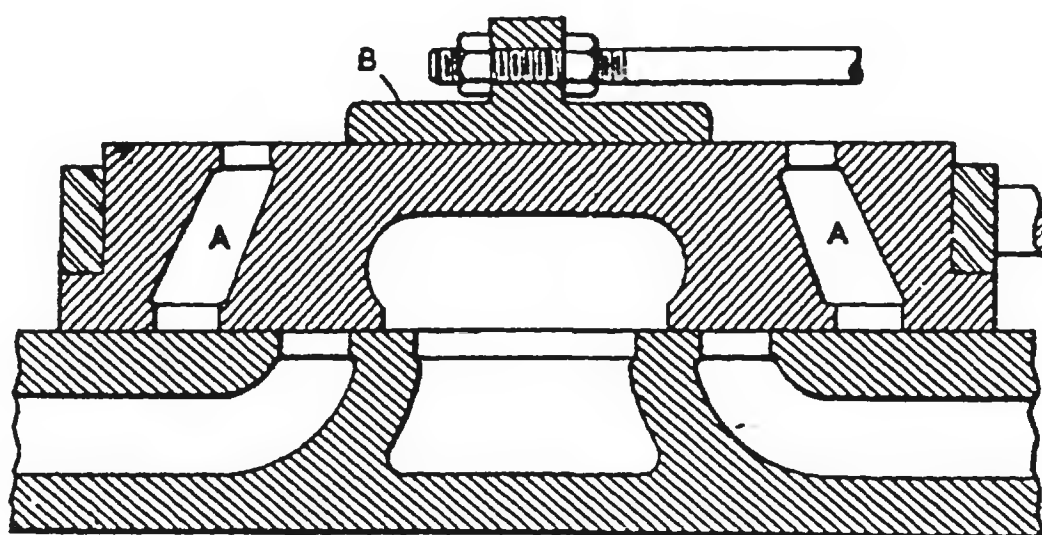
Slide Valve having Auxiliary Cut-off Valve
